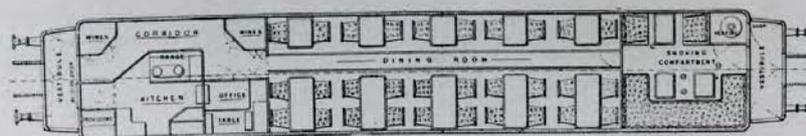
Peninsular and oriental express; wagon-restaurant, plan.
